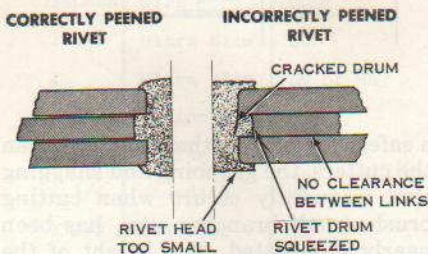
Views showing correctly installed rivet and rivet damaged by incorrect installation.
